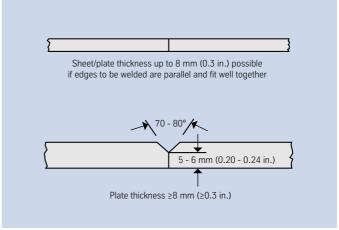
Edge preparation for plasma-keyhole welding of Pernifer 36.
